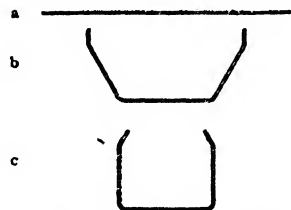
Drawing of sheet profiles. a. Sheet strip. b. Intermediate shape. c. Final shape.
